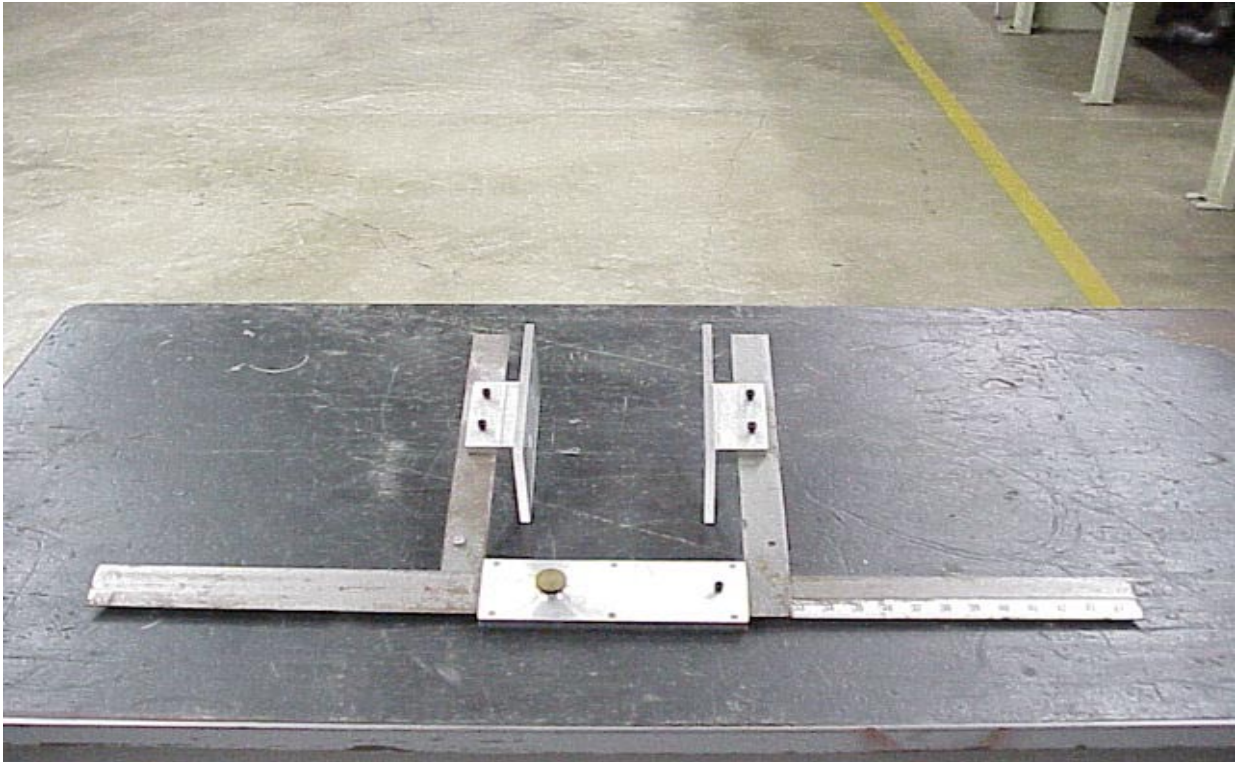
Two carpenters squares were joined together using a sliding mechanism with setscrews and wide flanges were added to help measure the thickness at the hump.
